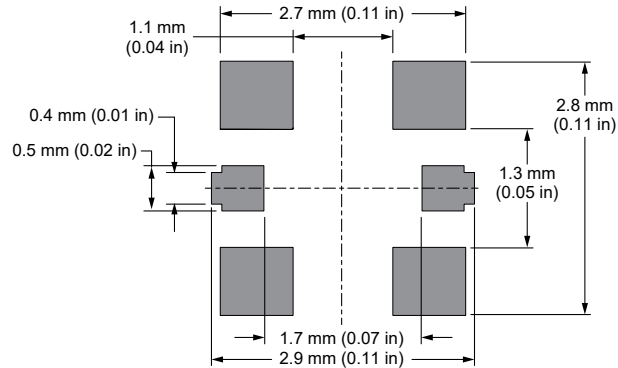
Recommended PCB Dimensions for the CONSWF001-SMD
